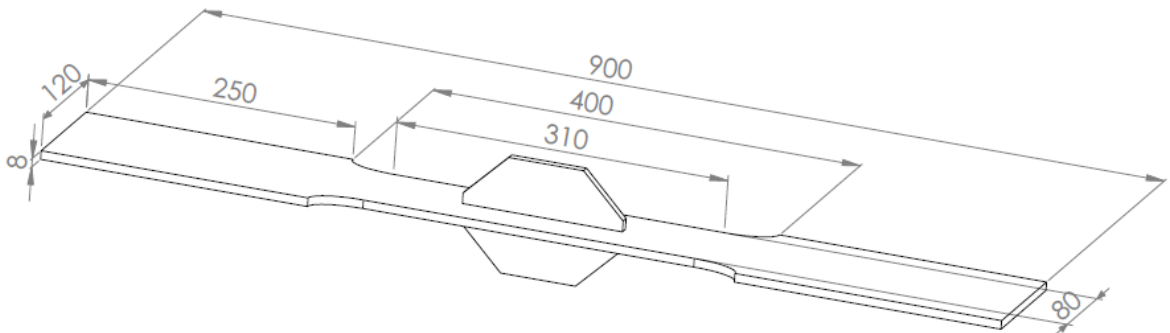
Main shape and dimensions (in mm) of the welded joint for steel grade S700 and VA loading.
